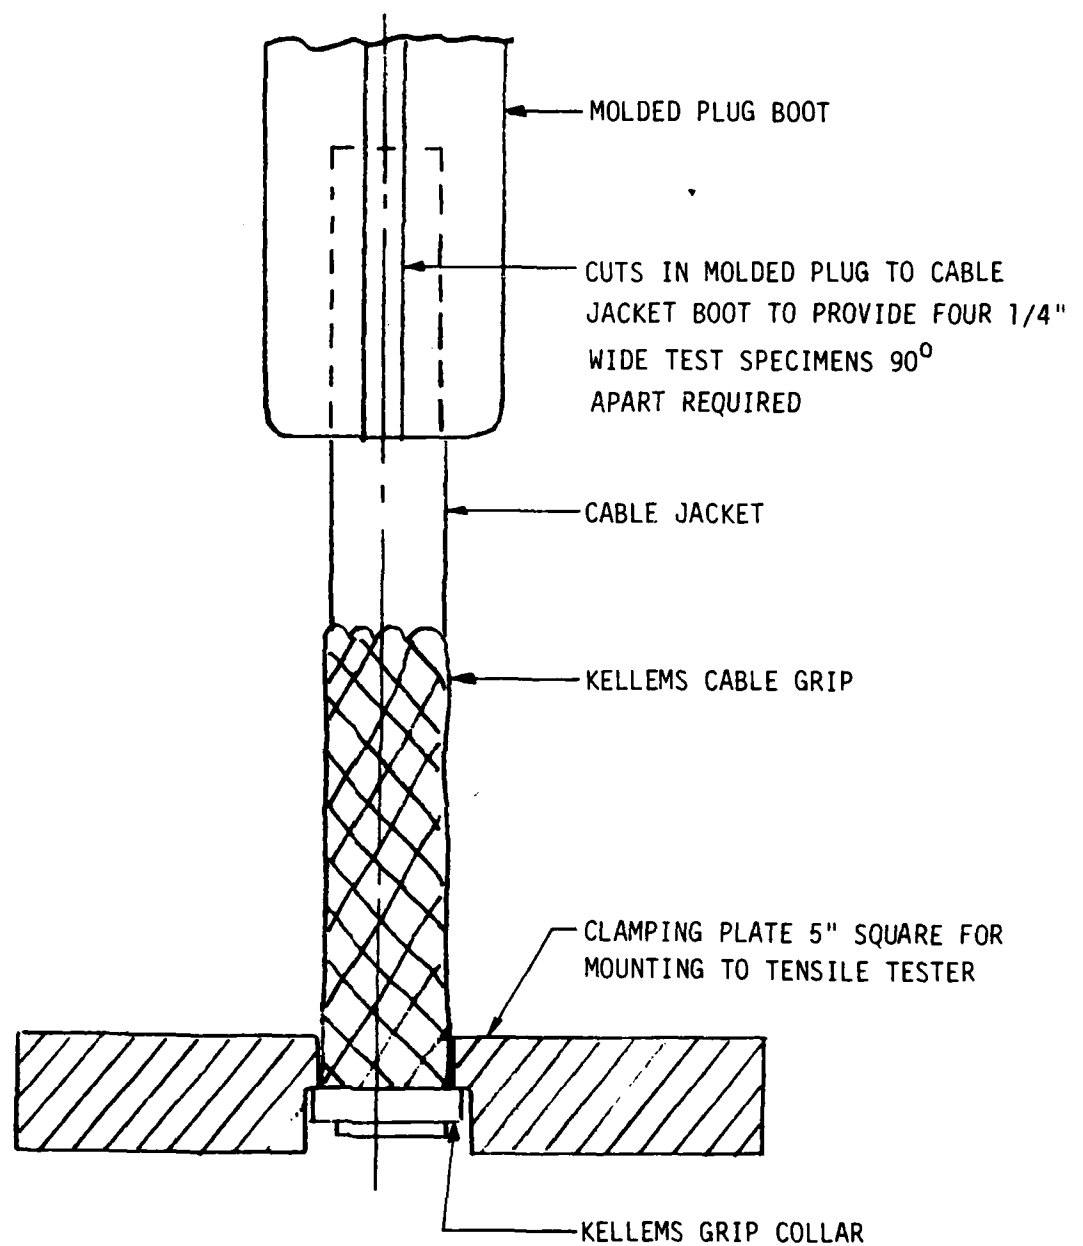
DESTRUCTIVE BOND TEST SET-UP - PLUG BOOT TO CABLE JACKET
